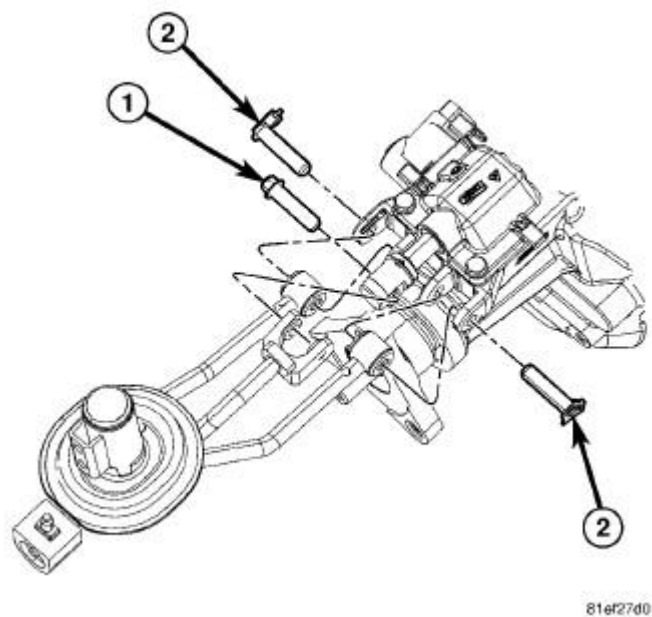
Identifying Shift Linkage Bolt & Roll Pins
